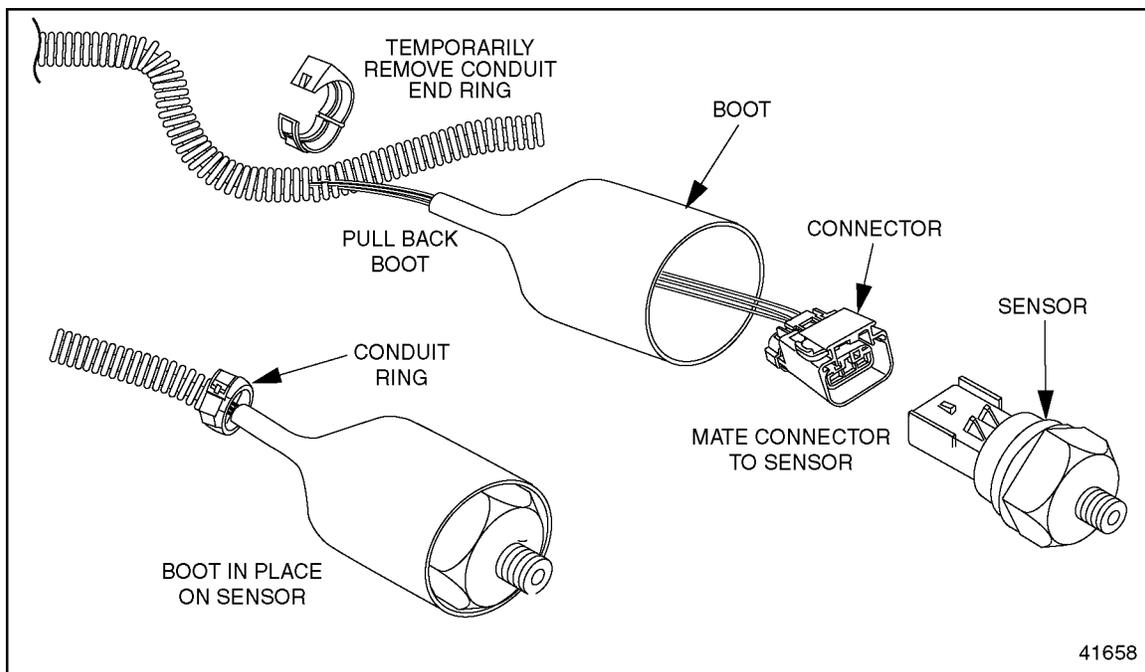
Exhaust Back Pressure Sensor with Sensor Boot
